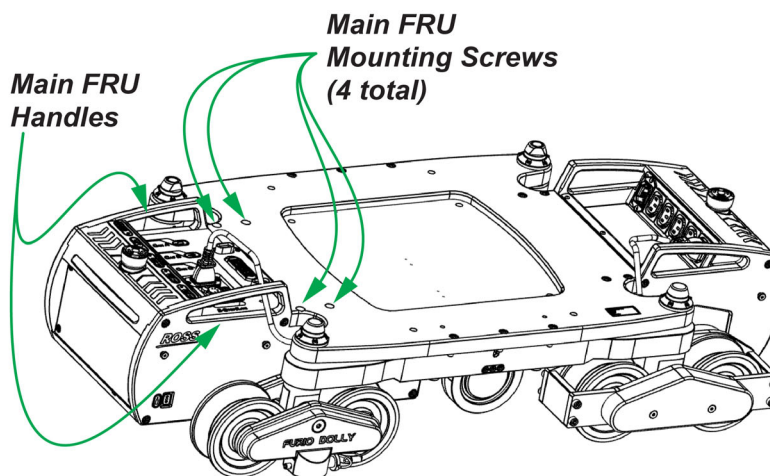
Furio SE Dolly Base, showing Four Mounting Screws that Secure the Main FRU
